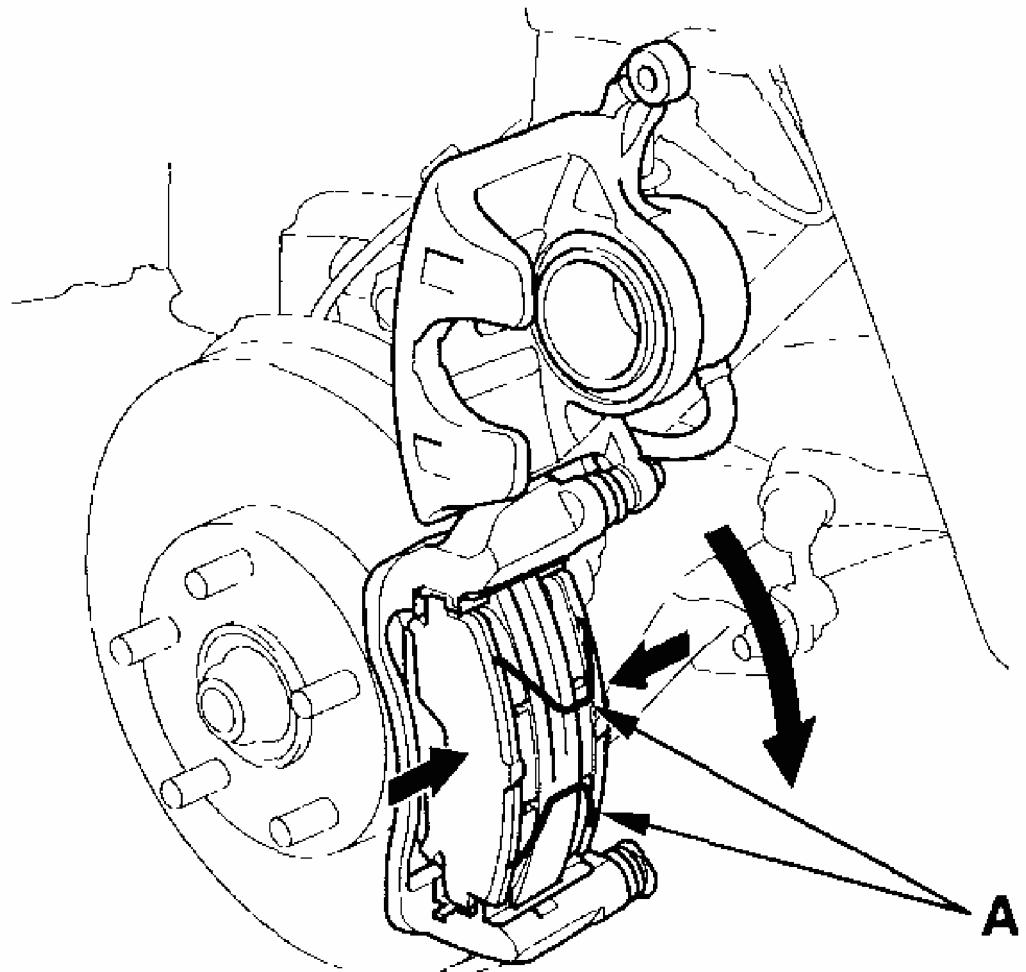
Pushing Piston For Caliper To Fit Over Brake Pads
